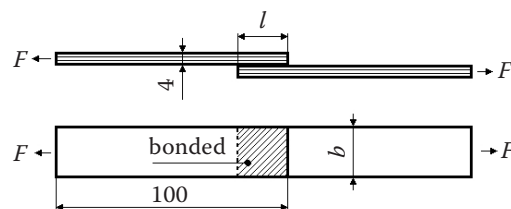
Tested assembly consisting of two bonded samples ($b = 20$ mm, $l = 12.5$ mm) (BROŽEK 2014)
